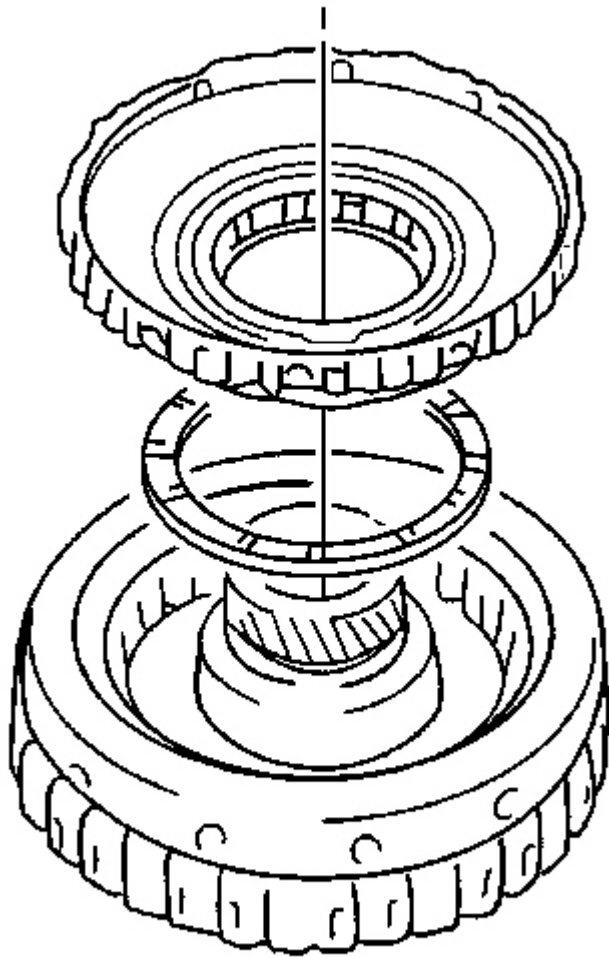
1-Way Clutch Assembly, Thrust Washer & Rear Planetary Sun Gear
